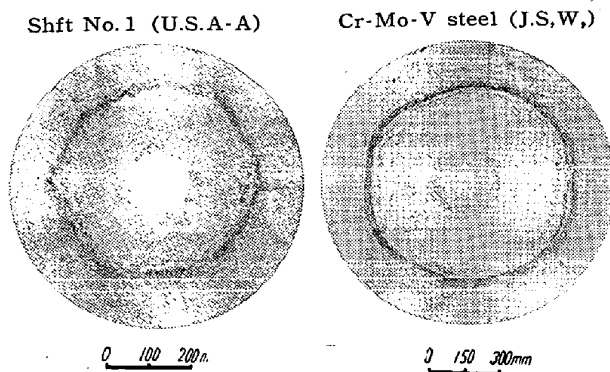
Sulphur print of the cross section of the body: Cr-Mo-V steel shafts.
